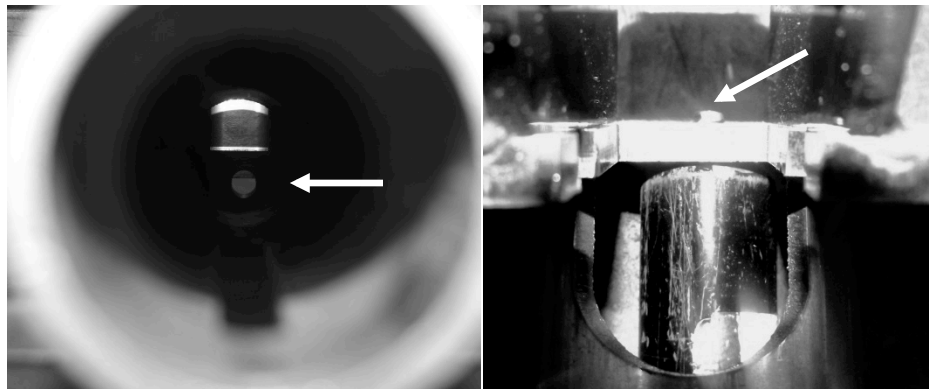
Hole at Back of Male Tube Subassembly (Left) and Properly Seated Gas Spring Tip (Right).
